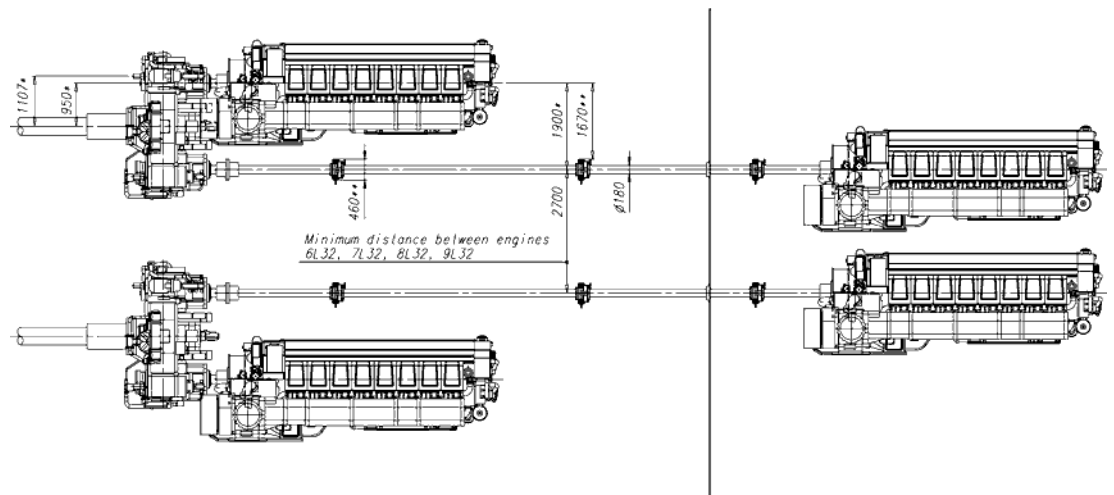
Main engine arrangement, in-line engines (DAAE059183)
